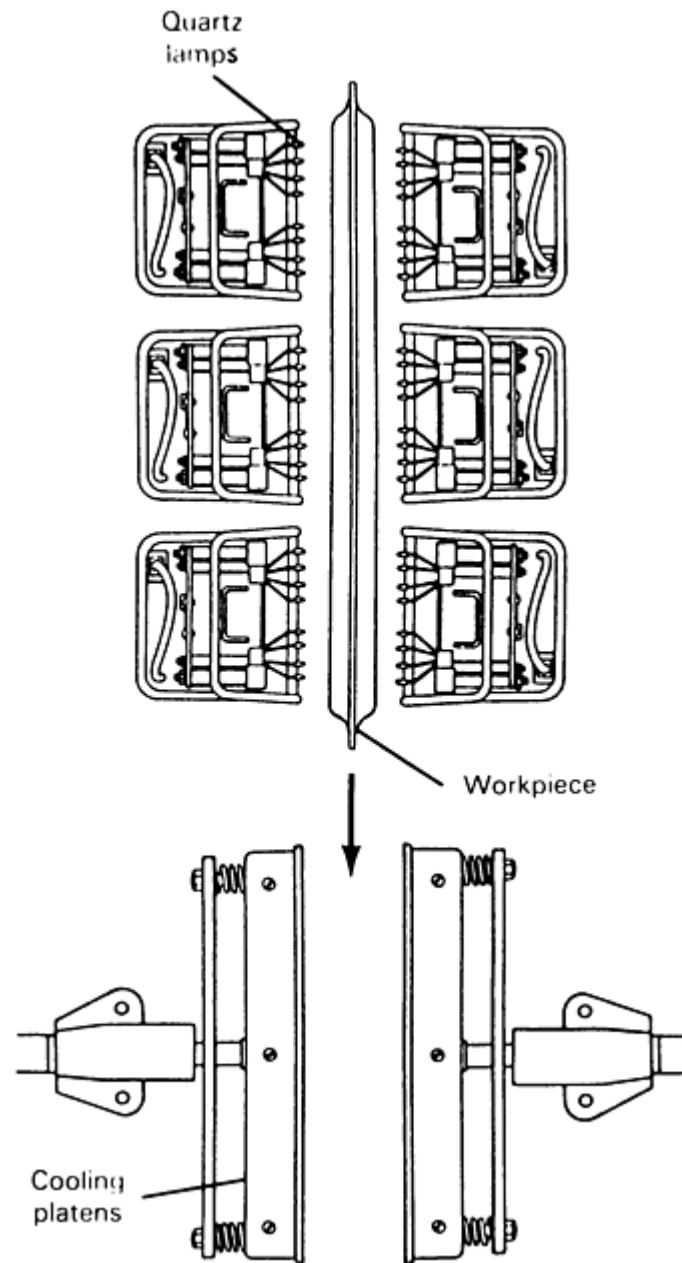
WORKPIECE SUBJECTED TO INFRARED BRAZING PROCESS PRIOR TO BEING MOVED TO COOLING PLATENS
